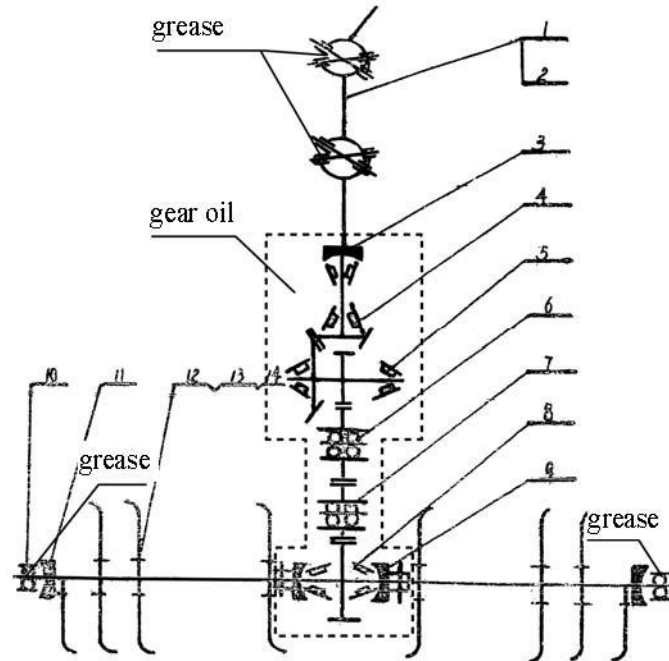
Installation Positions of Key Standard Parts of Lubricating Positions
